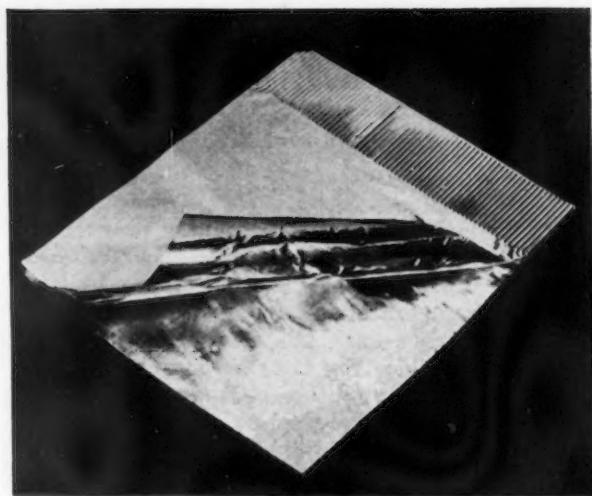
Heat-sealed crimped joint between two sheets of aluminum foil with thermoplastic coating.
